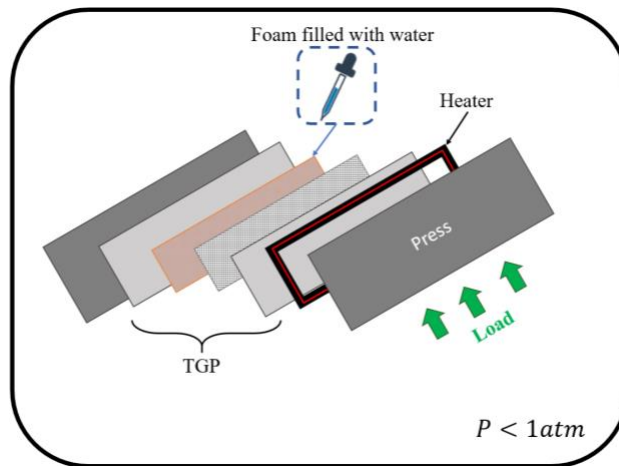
Exploded view of the one-step assembly process with in-situ filling and sealing.
